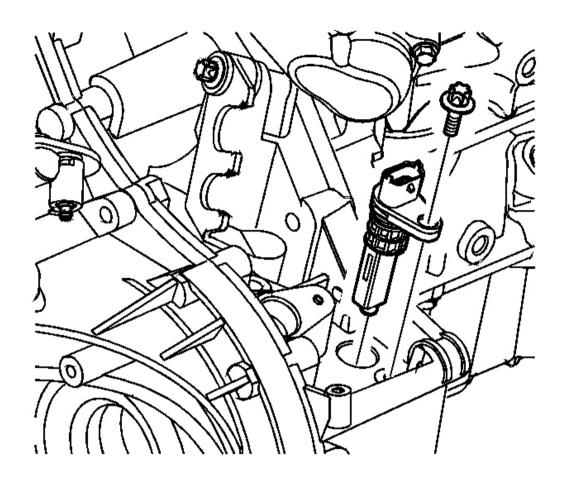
VSS & Retaining Bolt Courtesy of GENERAL MOTORS CORP.
